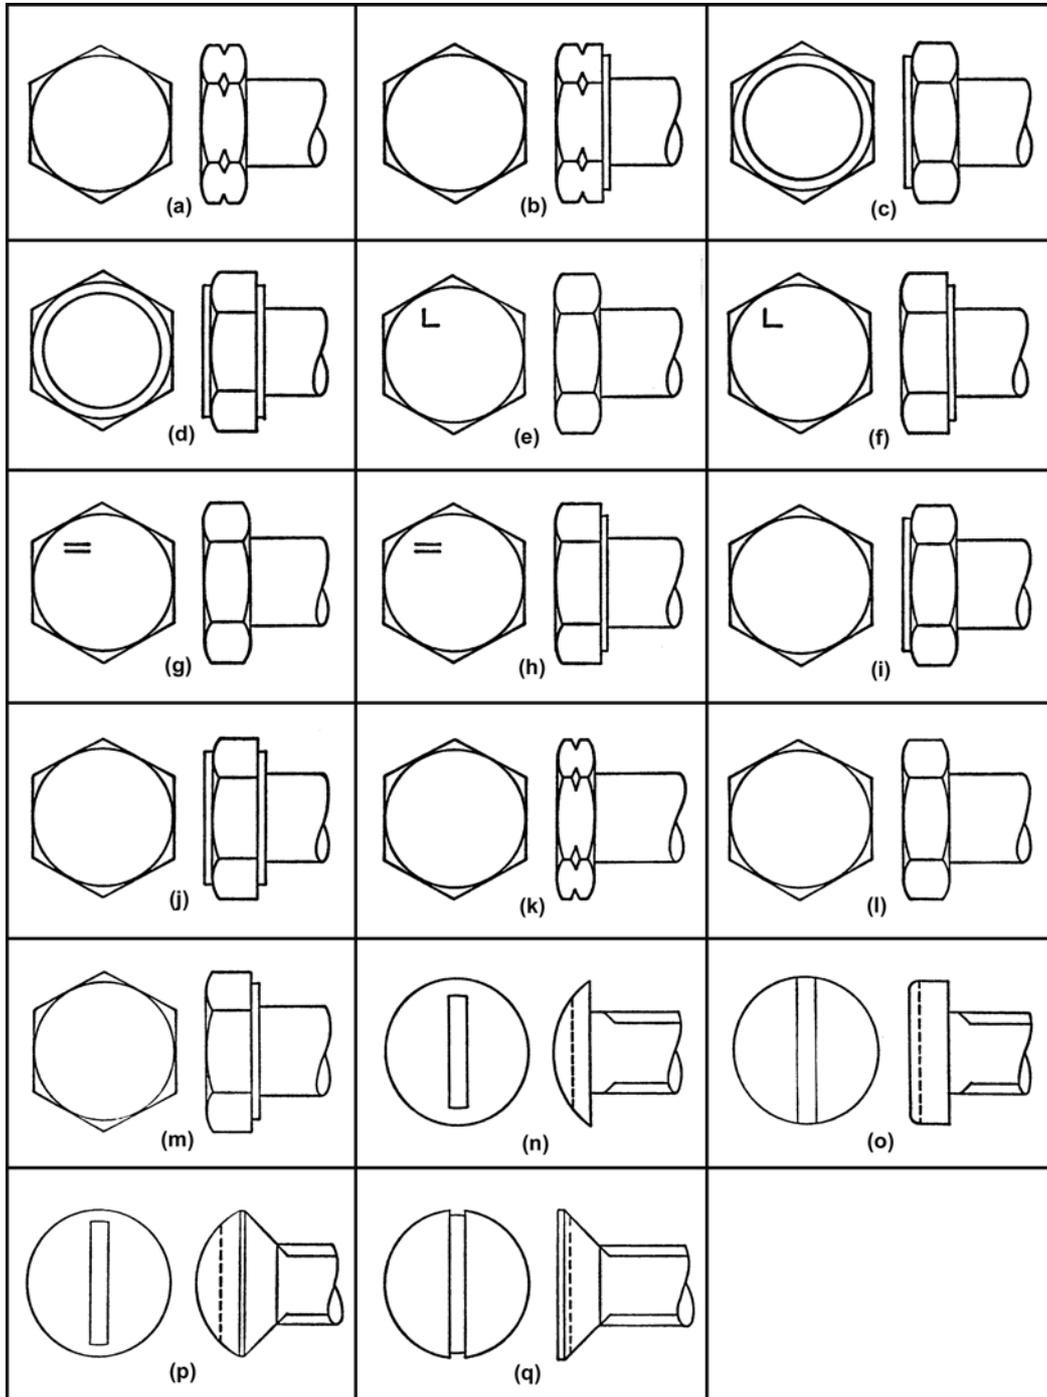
, Identification of British Standards BA/BSF Bolts and Screws.
